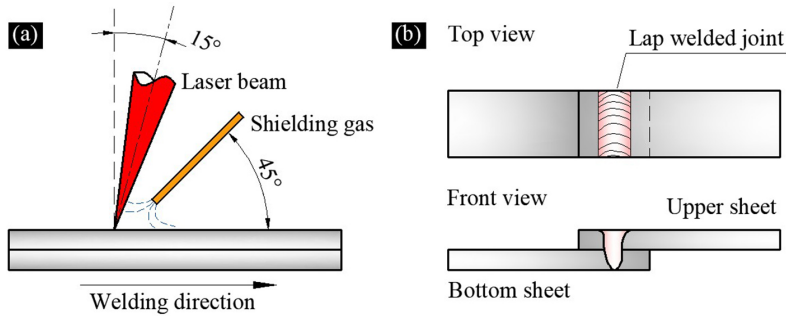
Schematic diagram of laser welding. (a) Laser welding, (b) lap welded joint.
